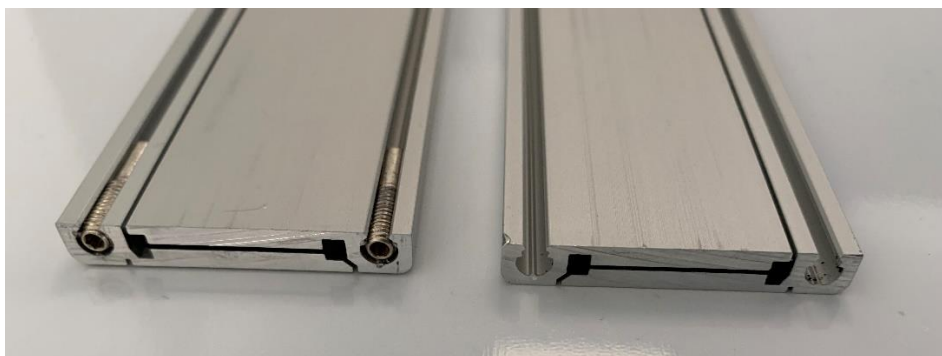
Left picture; with inserts mounted for pins. Right picture: no inserts (can't be connected to other panels).
